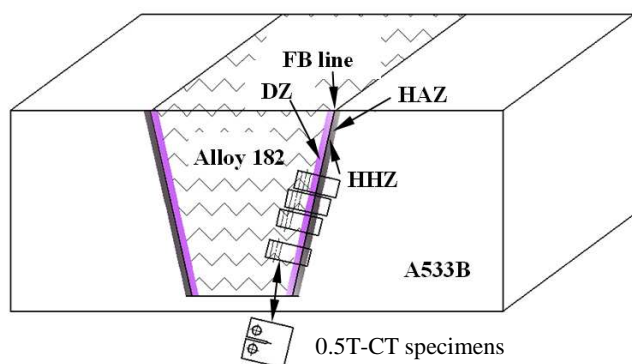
Schematic diagram of the sampling positions in an Alloy 182-A533B LAS dissimilar weld joint
